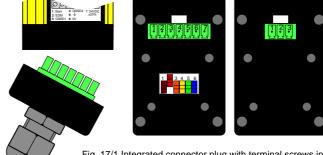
/1 Integrated connector plug with terminal screws in connector cover Receiver 7-pin, transmitter 3-pin.
